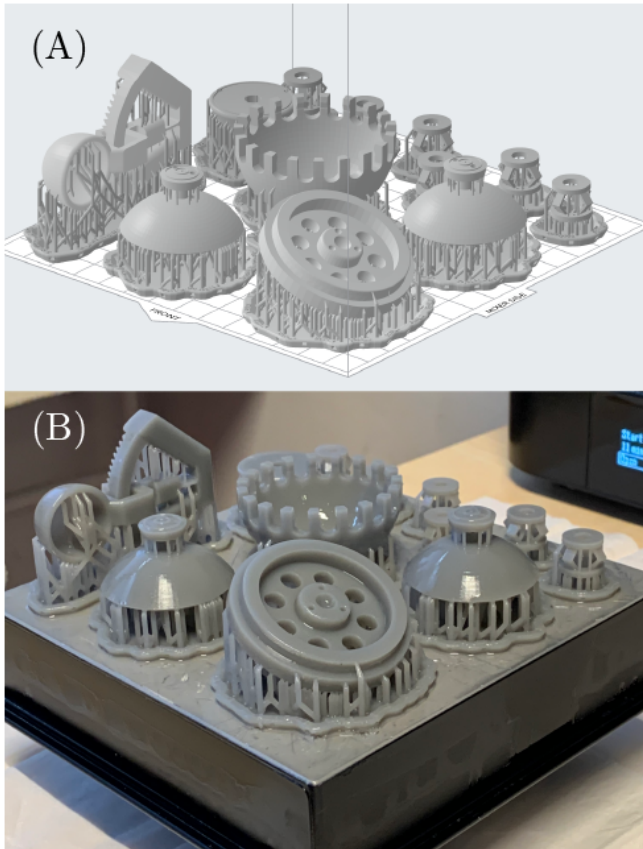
3D-printed parts. A) Image of the parts in Preform software with the final print directions. B) The printed parts with the final print direction.
